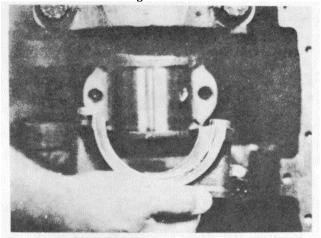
N-14. Position the Connecting Rod Cap to the Rod
